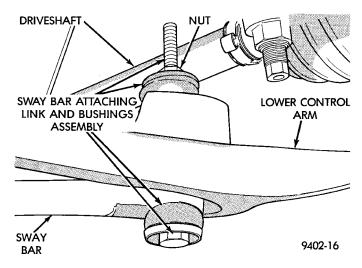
Sabilizer Bar To Lower Control Arm Attaching Links
